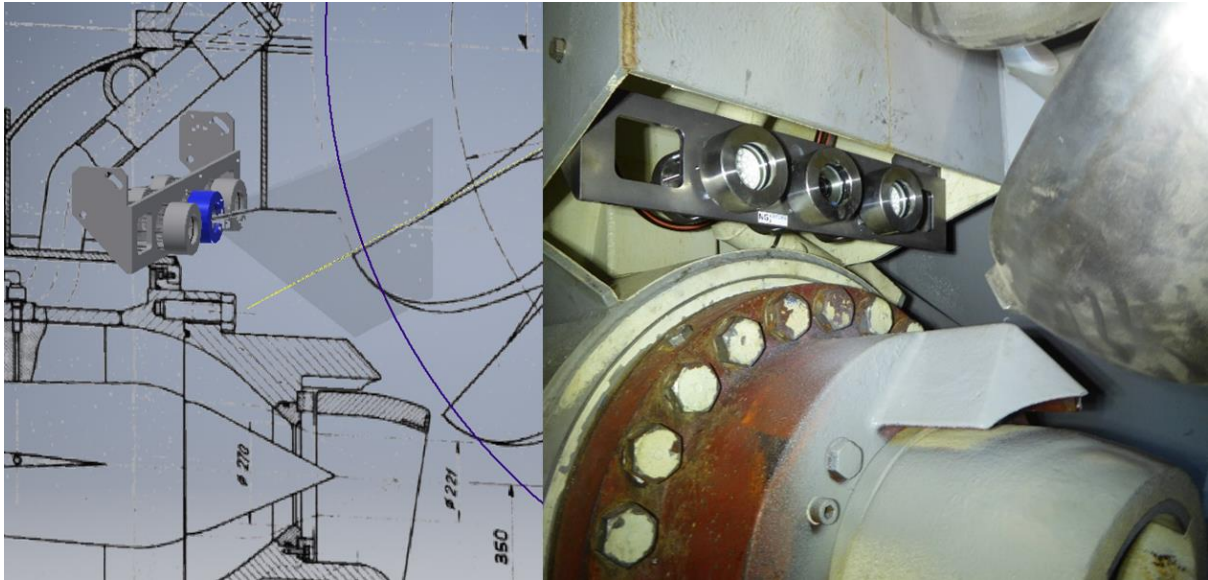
Image acquisition unit of the Swiss pilot project in CAD (left) and installed at site (right)
